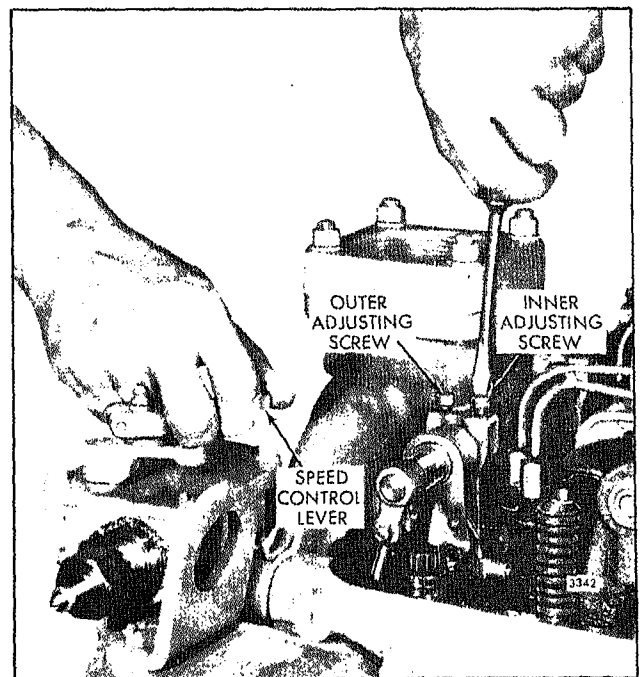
Positioning the Rear Injector Rack Control Lever
